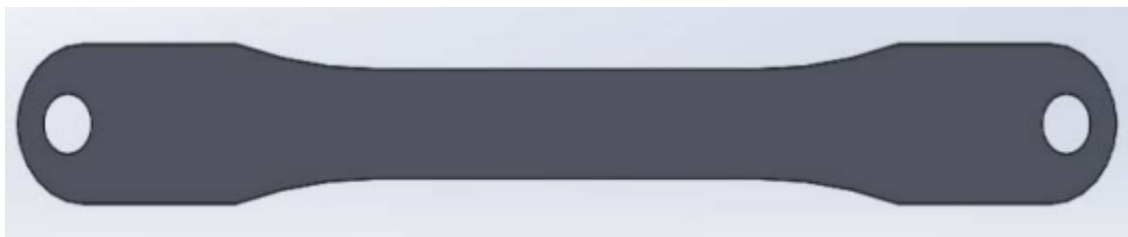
Tensile test specimen design proposed in [125]. The geometry and dimensions of this test specimen are equal to the dimensions of the specimens produced in this work except the rounding in the ends of the specimen, and the holes for the steel inserts. This design aims to prevent failure in regions other than the narrow section, where pure tension conditions exist.
